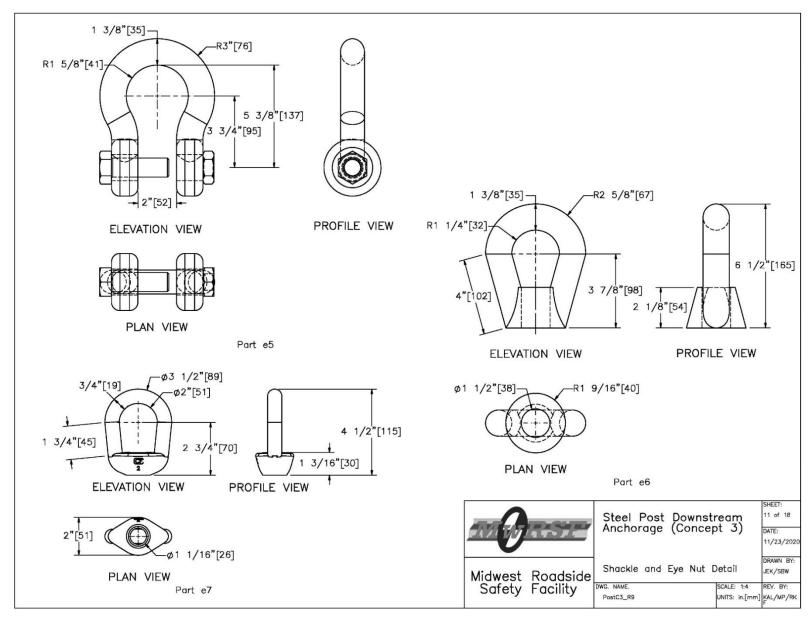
Shackle and Eye Nut Detail, Test No. SPDA-3
